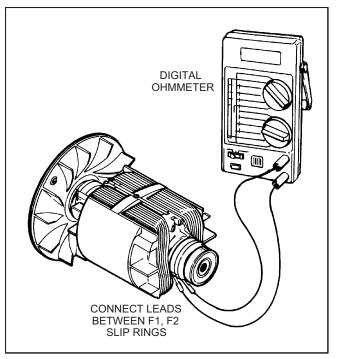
TESTING ROTOR FOR AN OPEN
